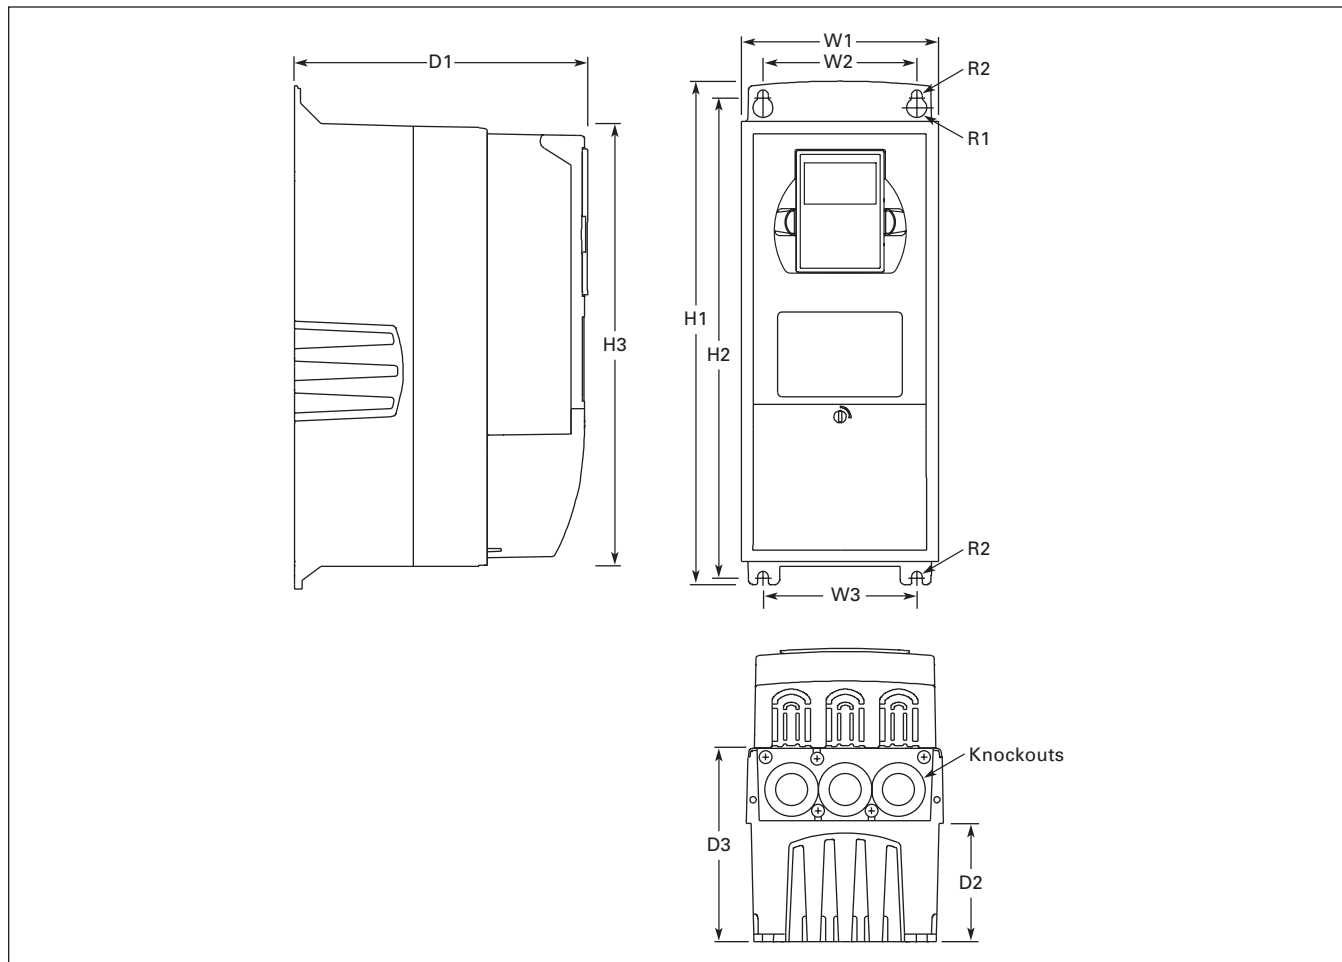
NEMA Type 1 and NEMA Type 12 SLX9000 Drive Dimensions, MF4 – MF6
